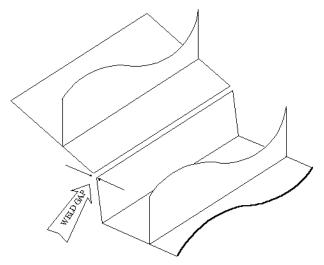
Weld Gap Location For Joining Assemblies
